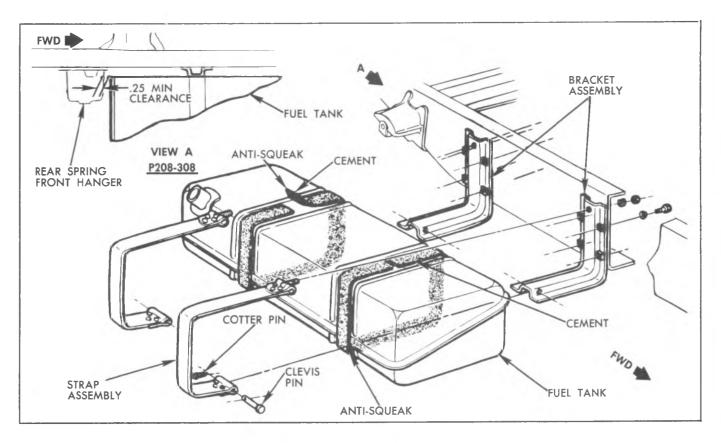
C-71-Fuel Tank and Mounting - P20, 30
